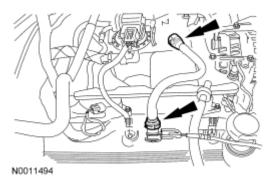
Intake Manifold Shield Courtesy of FORD MOTOR CO.
